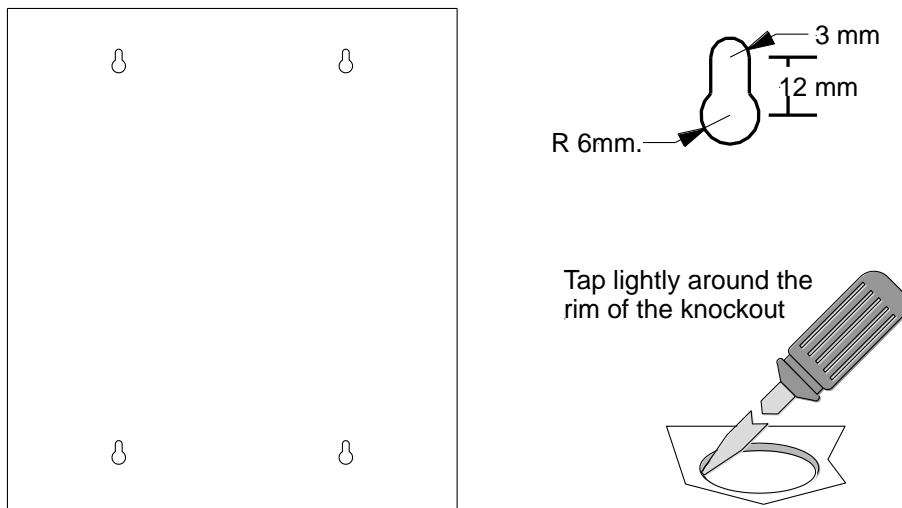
Example ZoneSense -DH Mounting & Removing Knockouts
